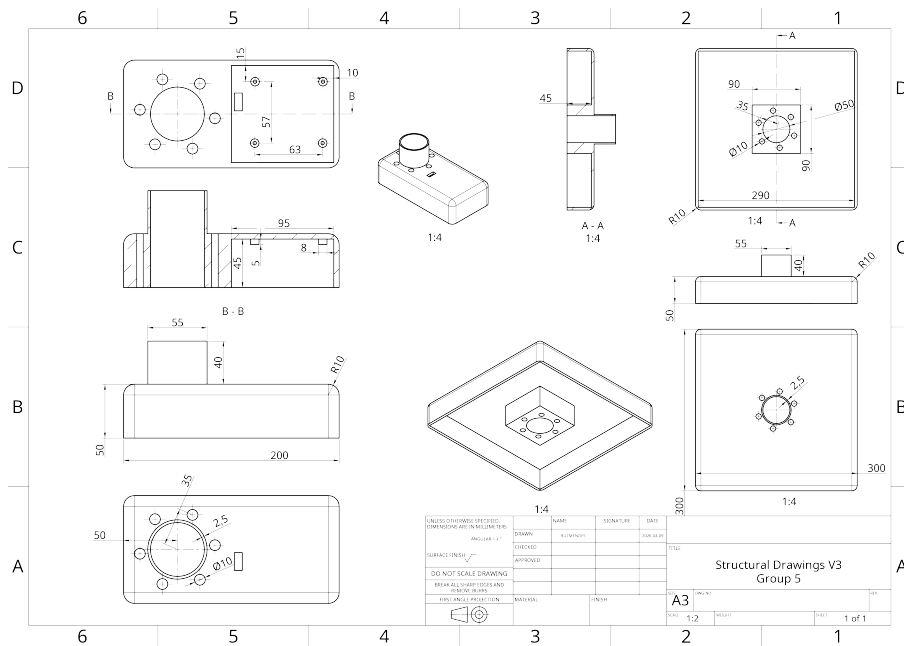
Mechanical drawing of the handrail node enclosure and mounting parts used during installation checks.
